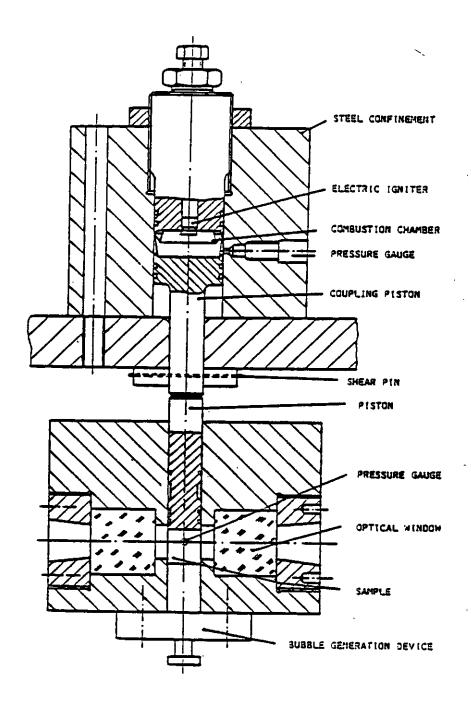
Schematic Drawing of EMI-AFB Compression Test Fixture.
